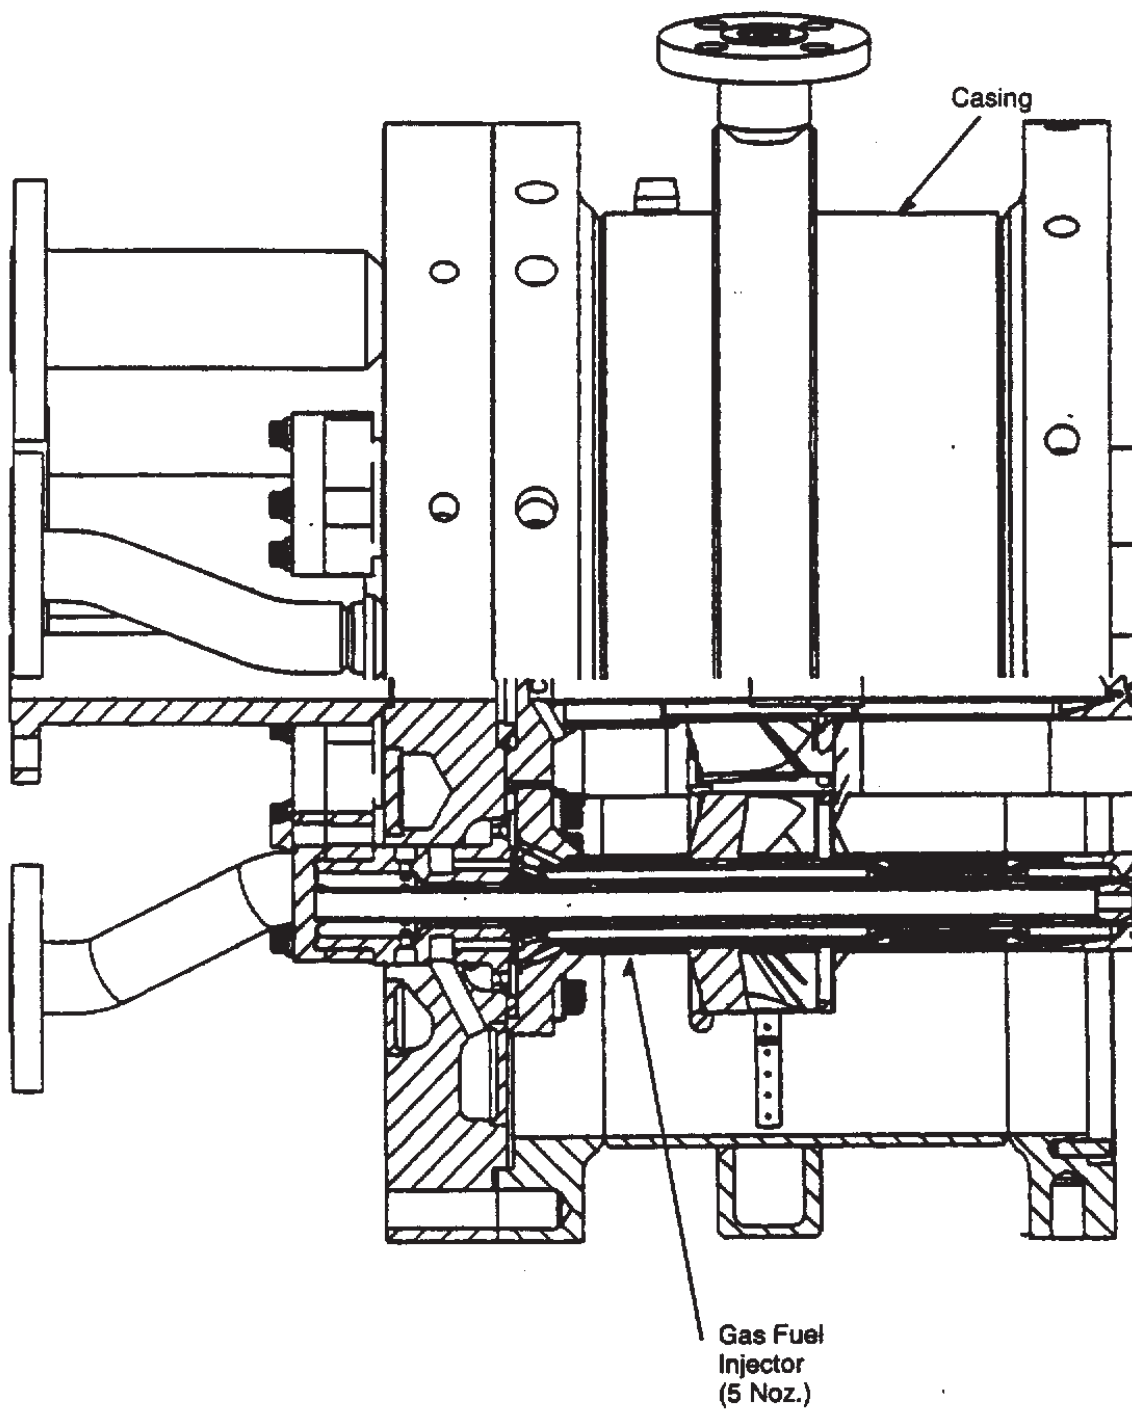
Fuel Nozzle Cover and Casing Assembly (Gas Only)
